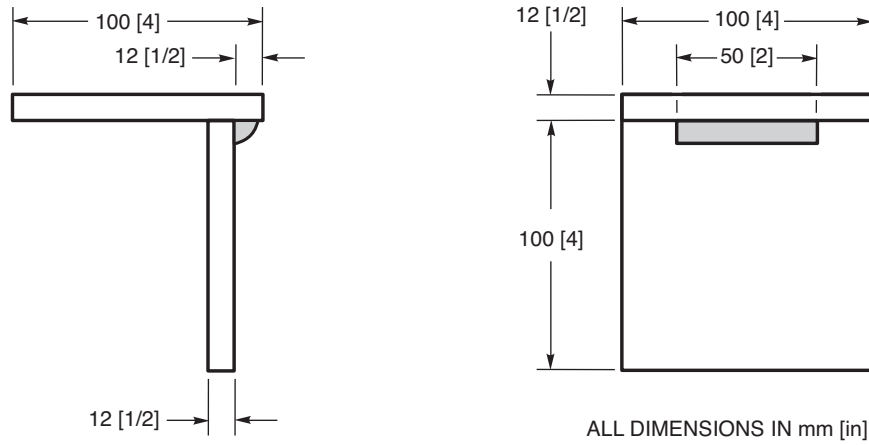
Fillet-Weld-Break Specimen—Tack Welder Qualification (see 7.25.3)
